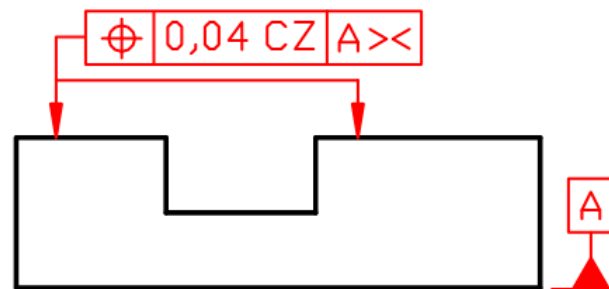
The position tolerance with the CZ and >< modifiers uniquely indicates that two tolerated surfaces together shall be parallel to datum A—the recommended specification that shall be used instead of the specification shown in Figure 11.
